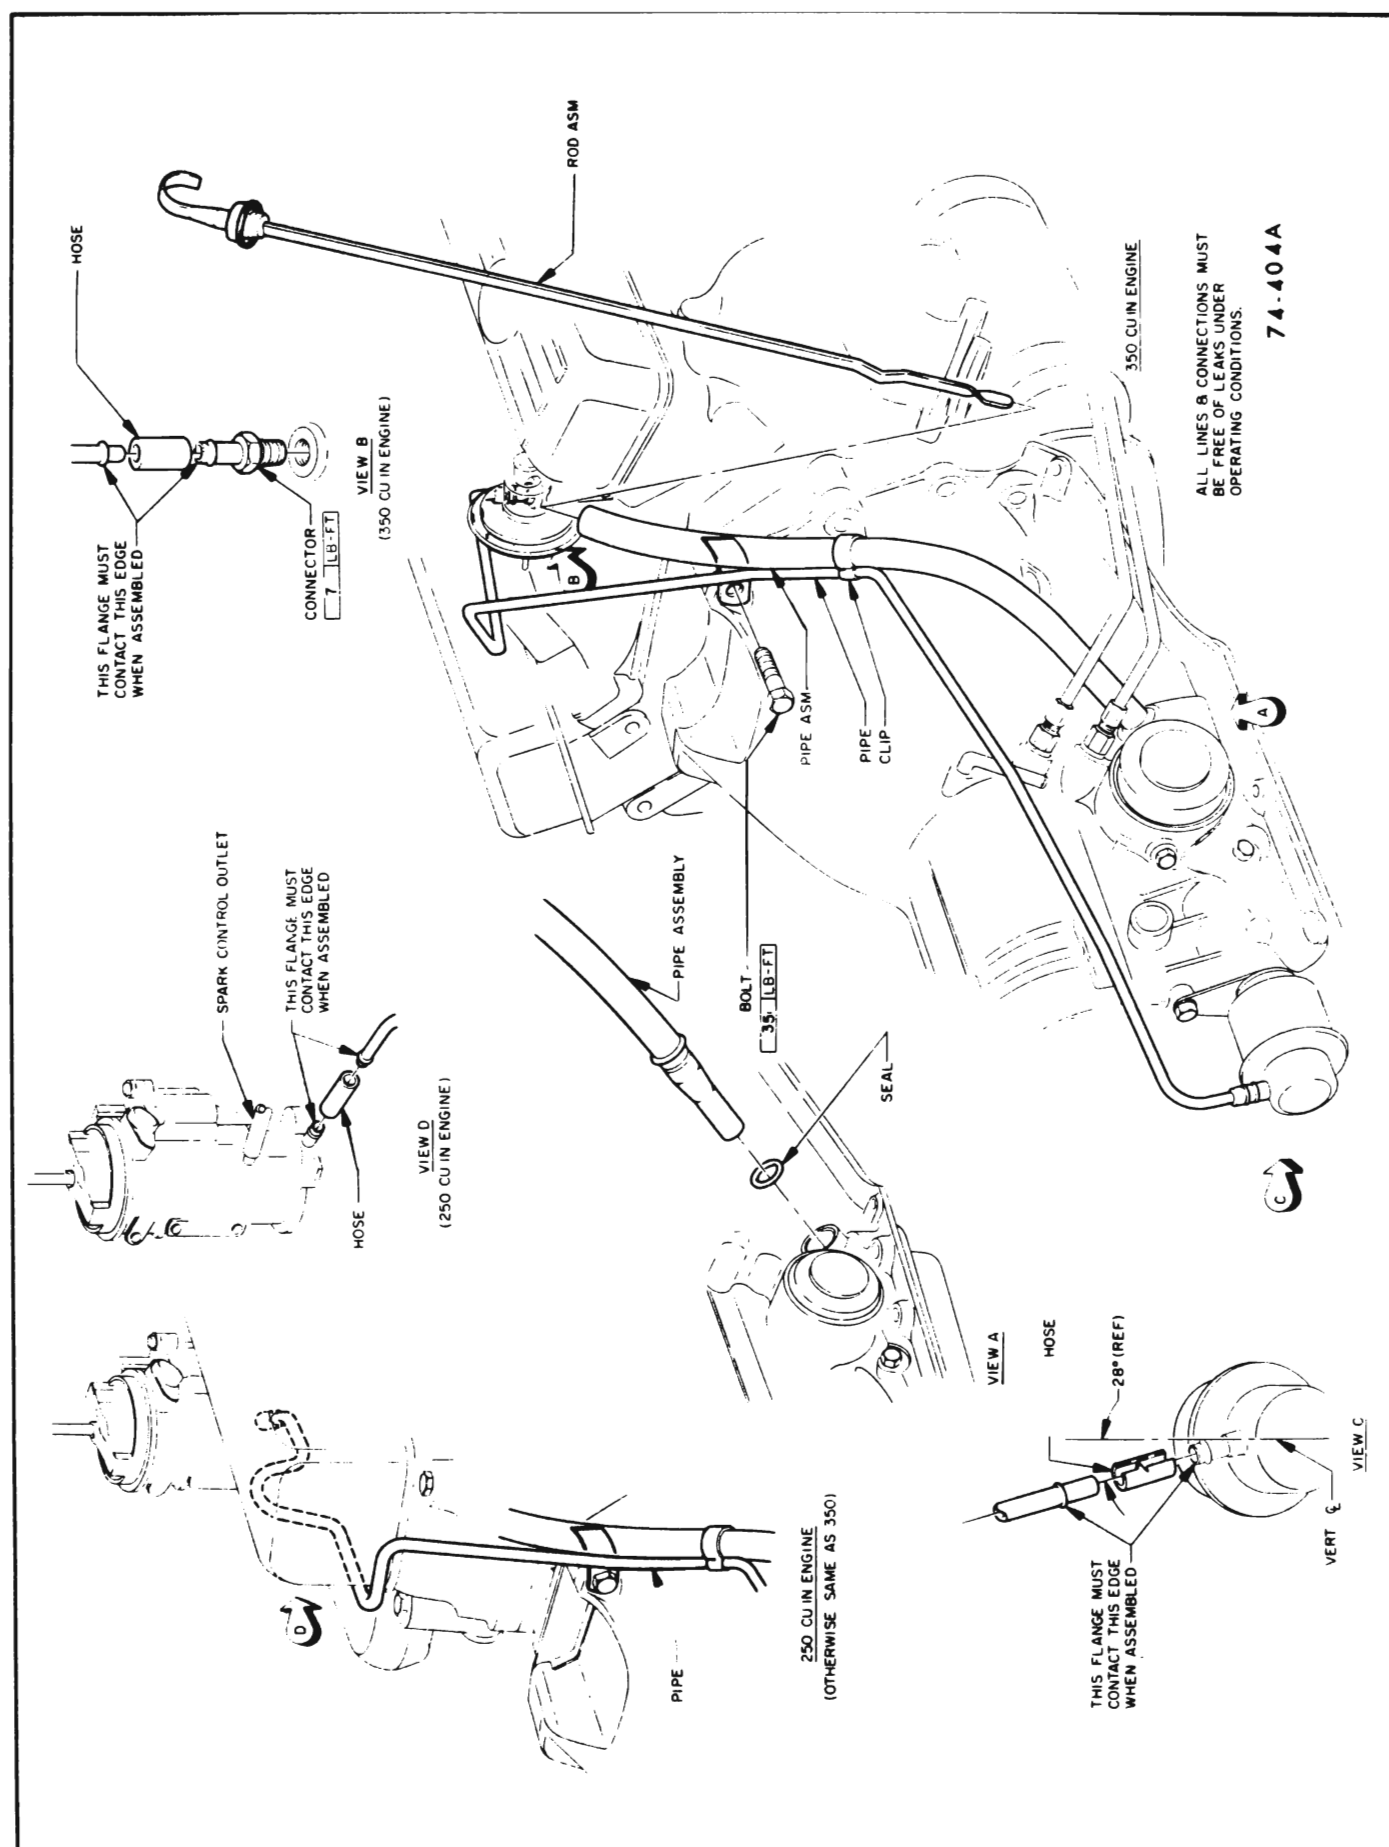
Vacuum Line and Oil Filler Pipe
